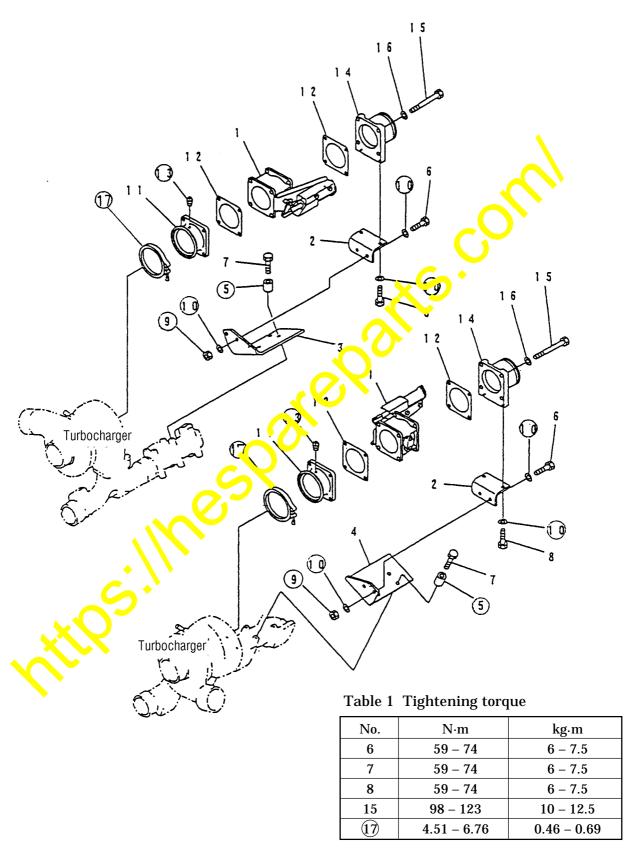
Schematic diagrams for the engine parts which need to be installed for this modification
